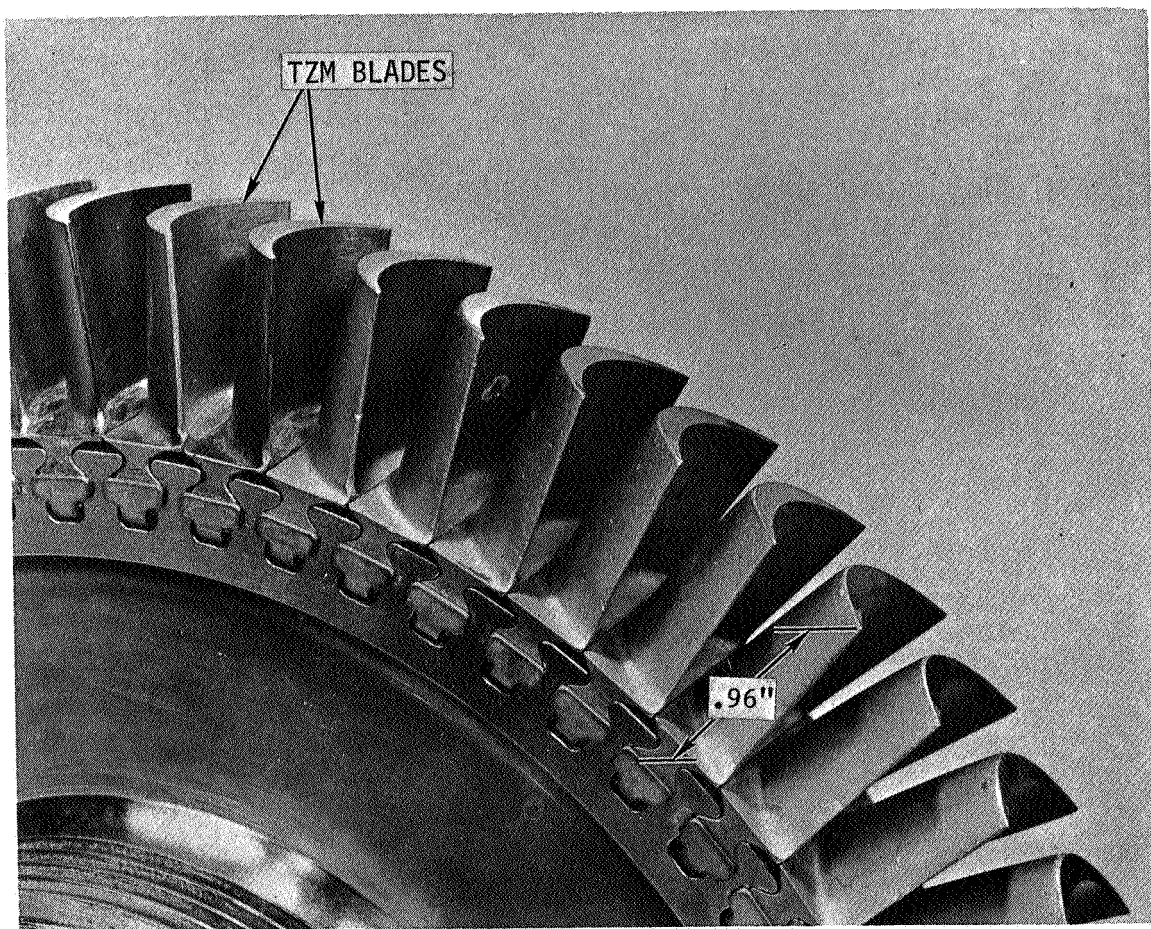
Second Stage Turbine Wheel Assembly After 2000 Hour Endurance Test, Vapor Blast Cleaning and Reassembly. (C6602215)
